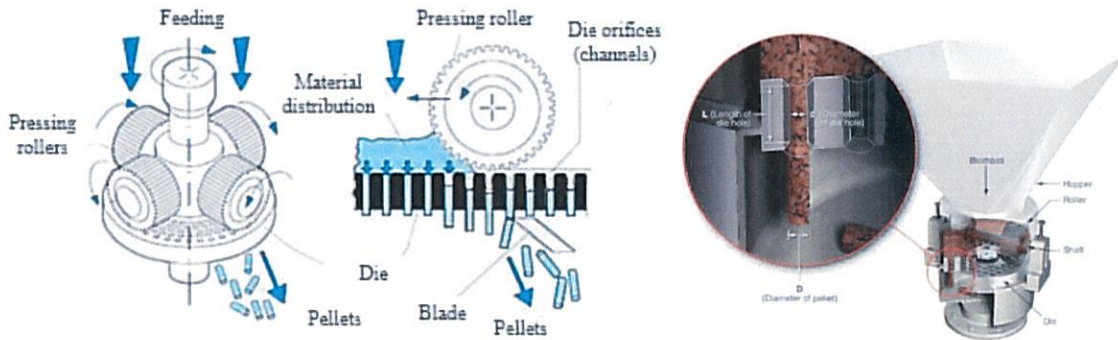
Diagram and operating principle of the flat die pelleting machine, [39]
